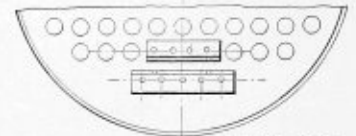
DETAIL OF BRACING ON LOWER PART OF BACK HEAD.
